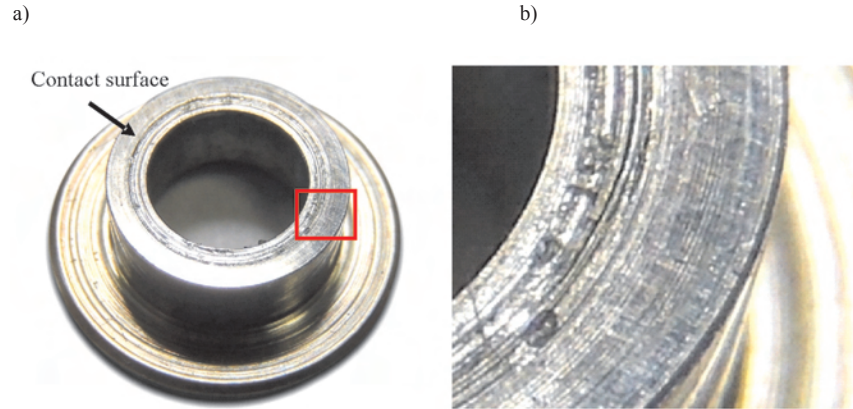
Damaged axial bearing: a) scale 3:1, b) scale 30:1
